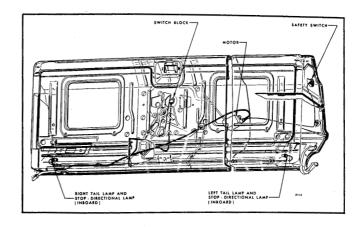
Tail Gate Wiring - Chevrolet "B" Bodies
